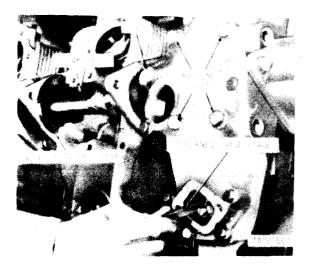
Installing valve rocker arm cover and adjusting intake valve clearance (cylinder No. 6R).
